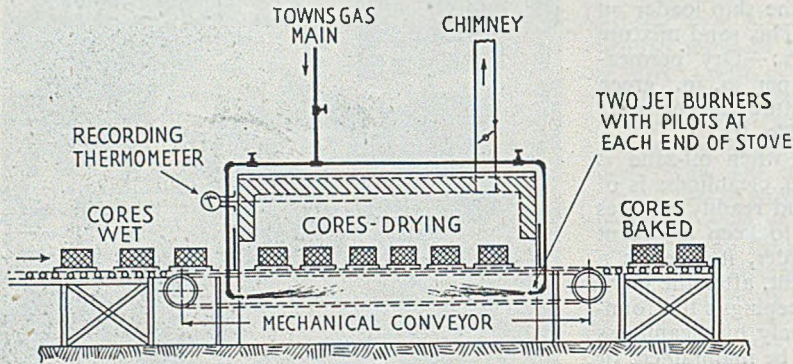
Sketch showing the Construction of the Tunnel-type Core-drying Stove, 13 ft. long, through which Cores are carried on a Motor-driven Metal Conveyor.
